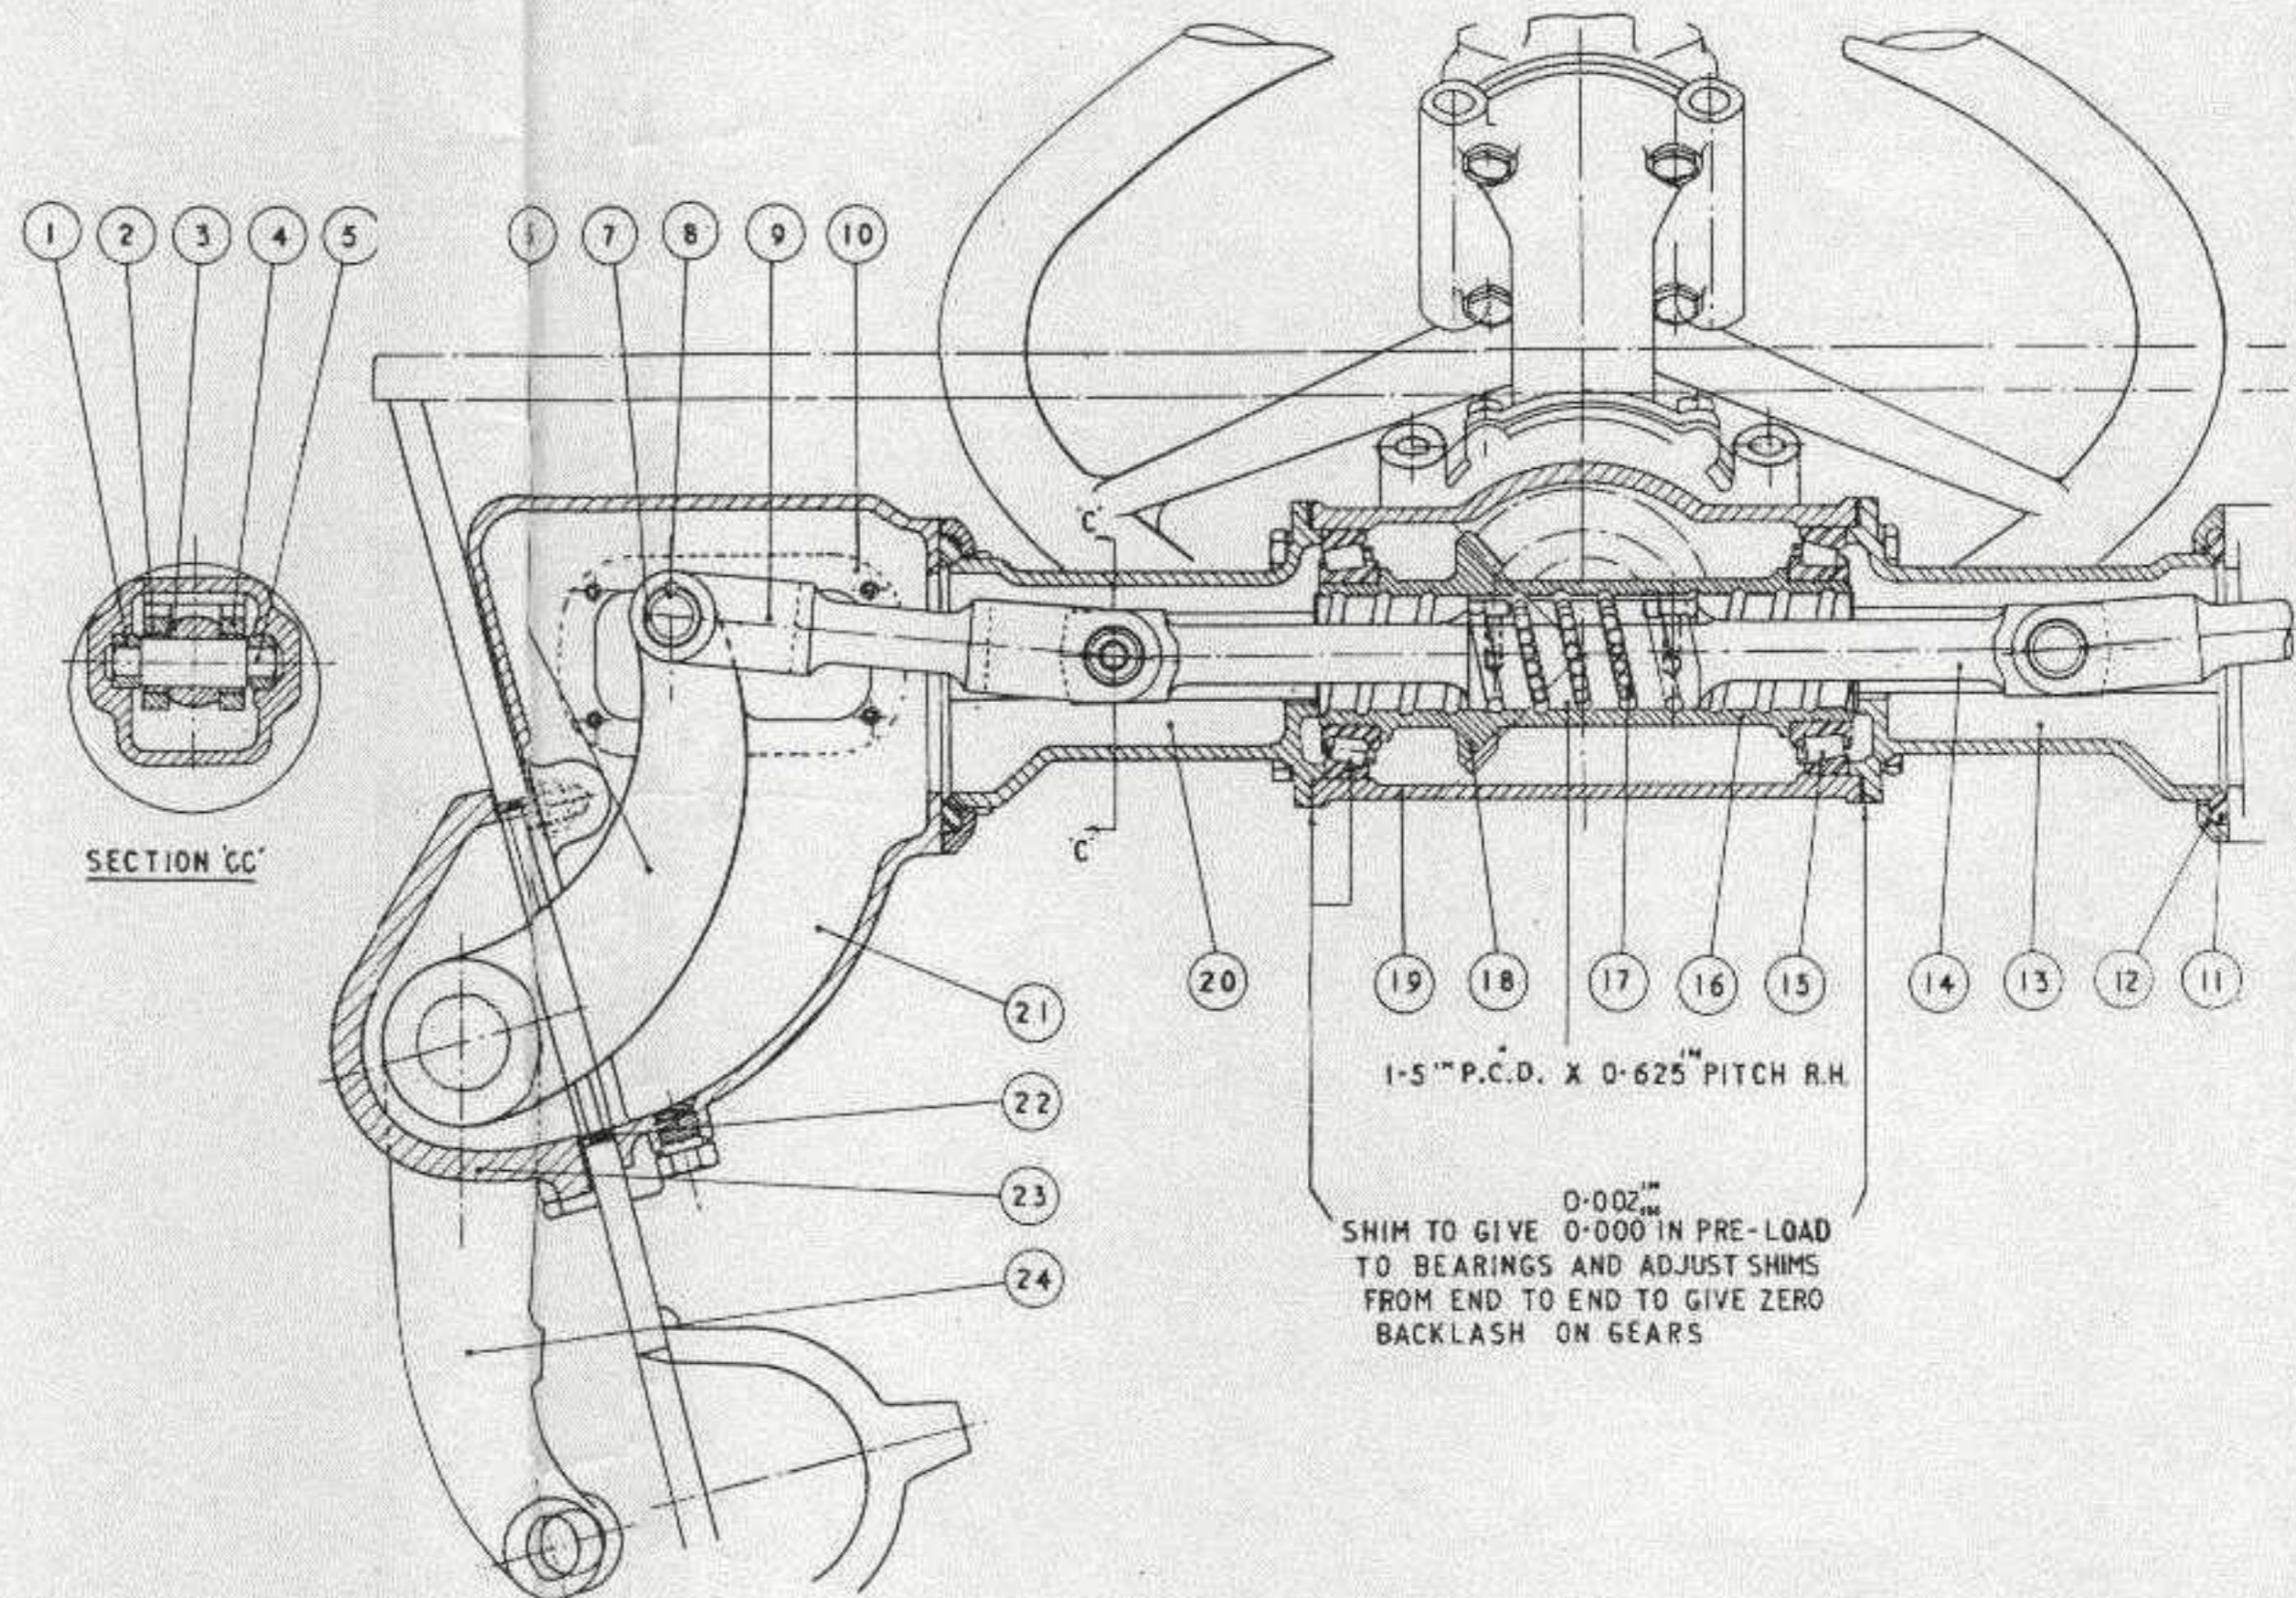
STEERING GEAR - GENERAL ARRANGEMENT - FRONT ELEVATION
